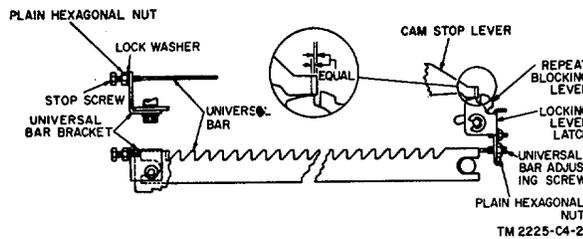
Universal bar stop screw adjustment (TT-76B/GGC, serial Nos. 256 and above, Order No. 13931-PC-58 and all subsequent procurements).
